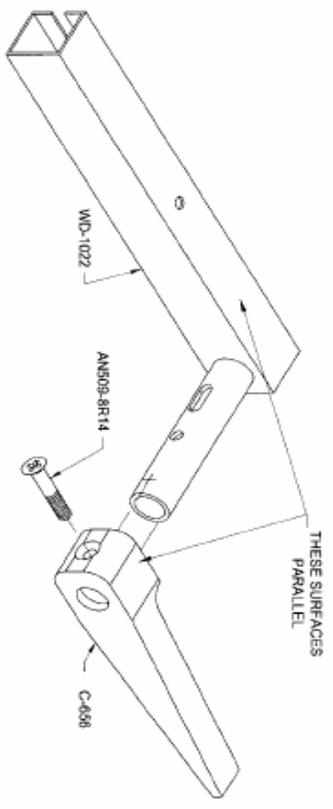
MATCH-DRILL CANOPY HANDLE TO DOOR HANDLE ASSEMBLY
